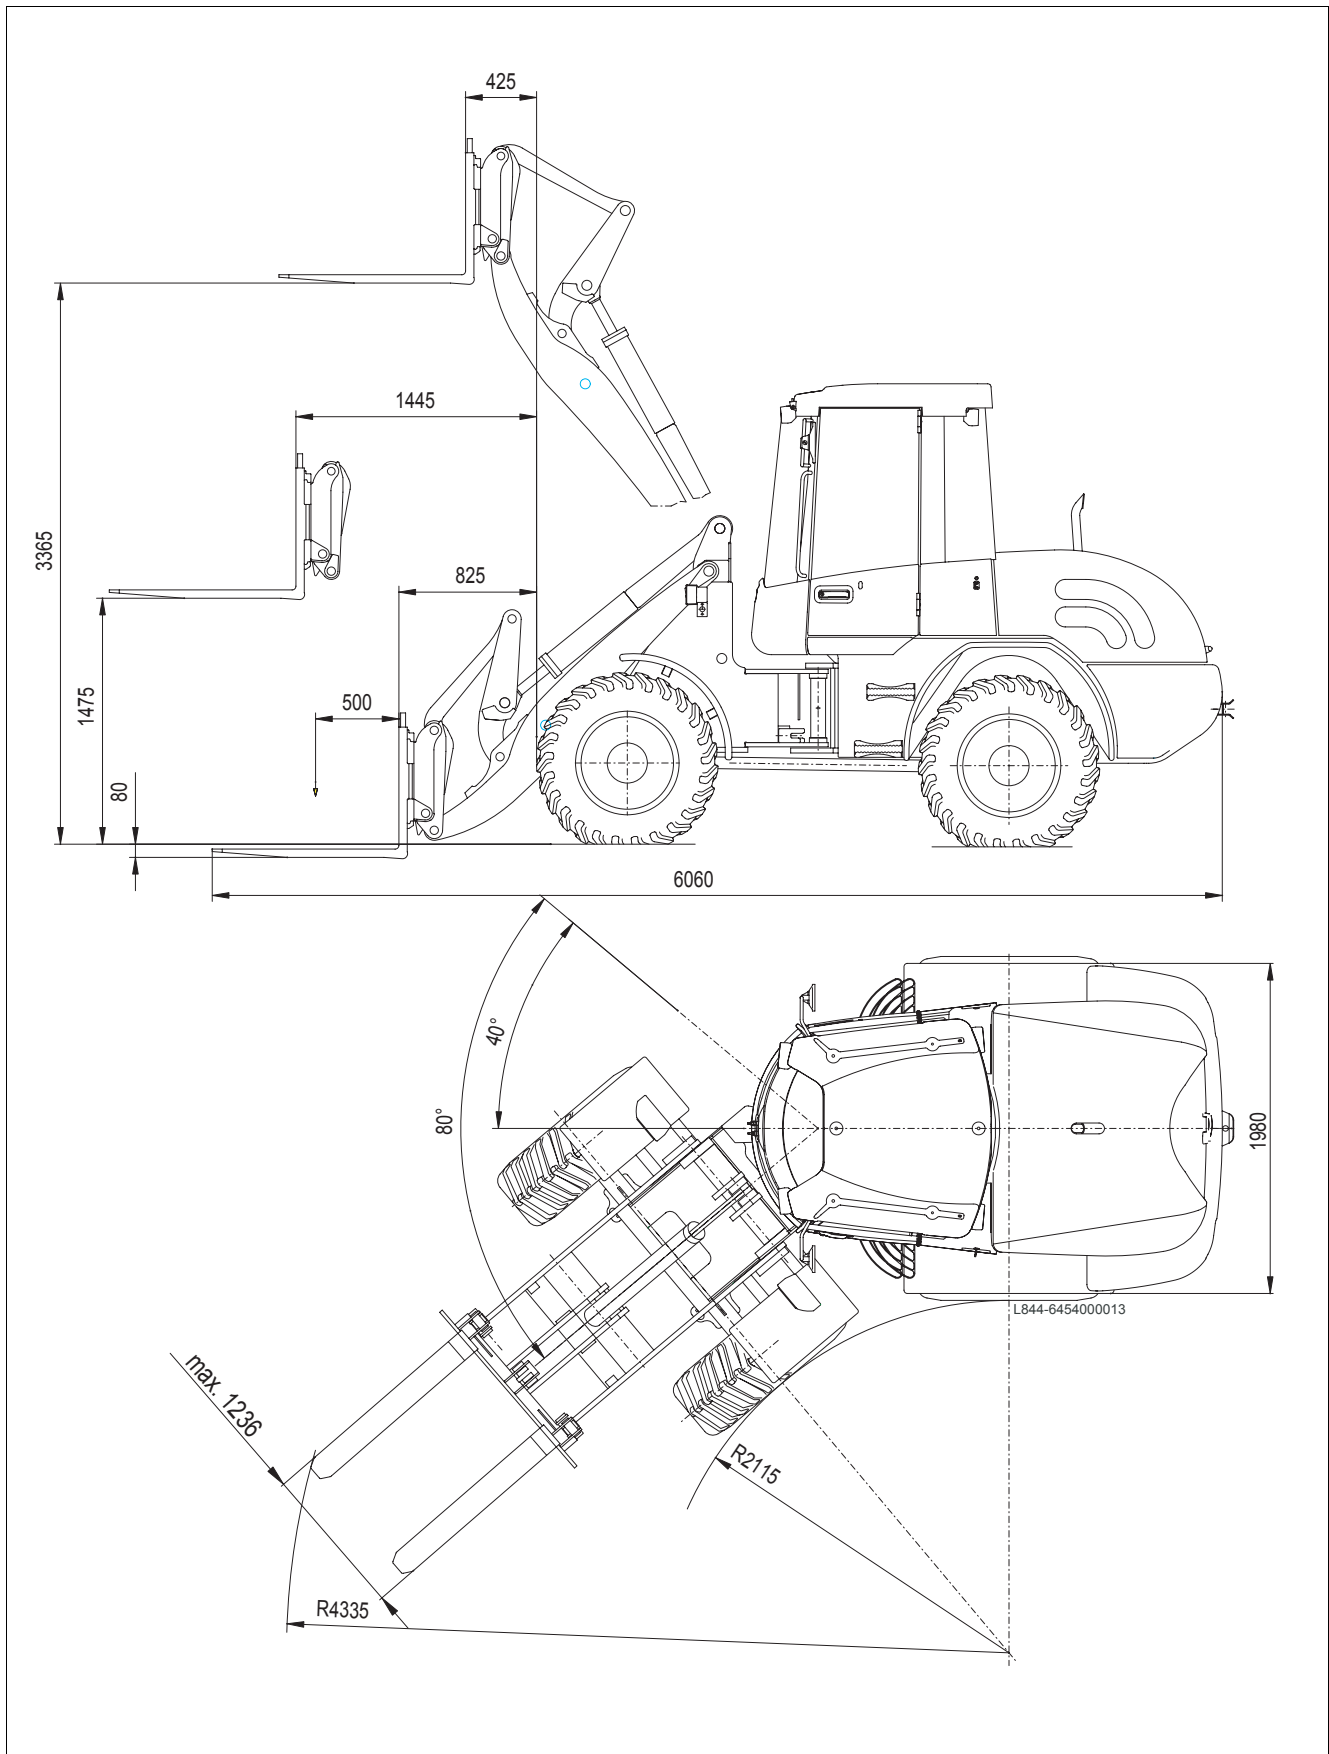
Dimensioned drawing with fork lift attachment and 405/70 R 20 tires
